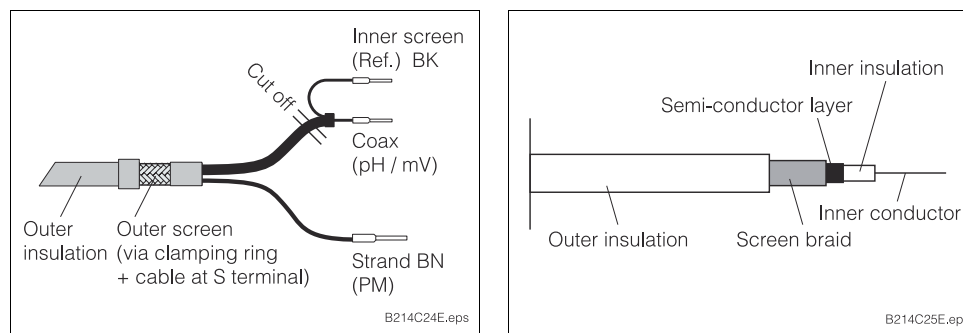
Cutting off the cable end (left) and make-up of inner coaxial cable (right)
